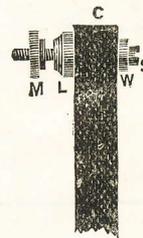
METHOD OF ATTACHING BINDING-SCREW TO TOP OF CARBON PLATE. C, carbon; W, washer; S, head of screw; L, lower nut; M, upper nut or milled head.
